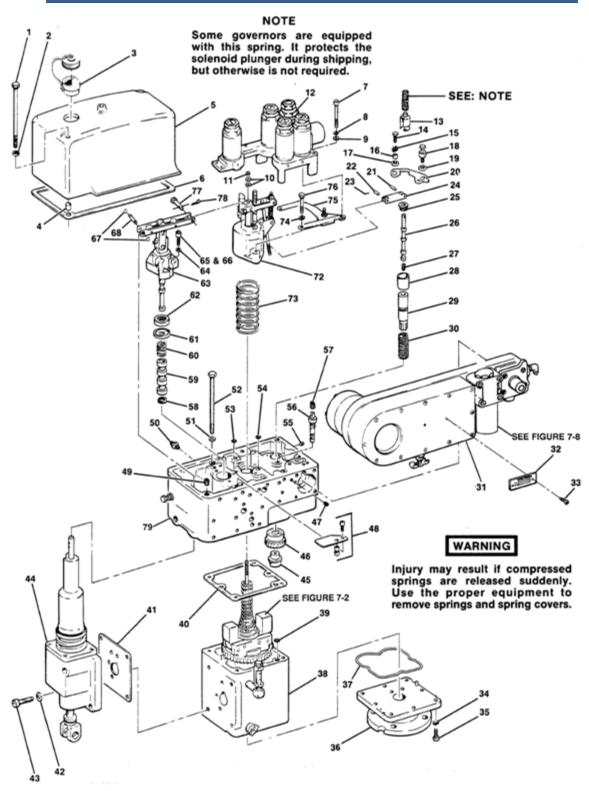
Illustrated Parts of PGEV Section Assemblies
